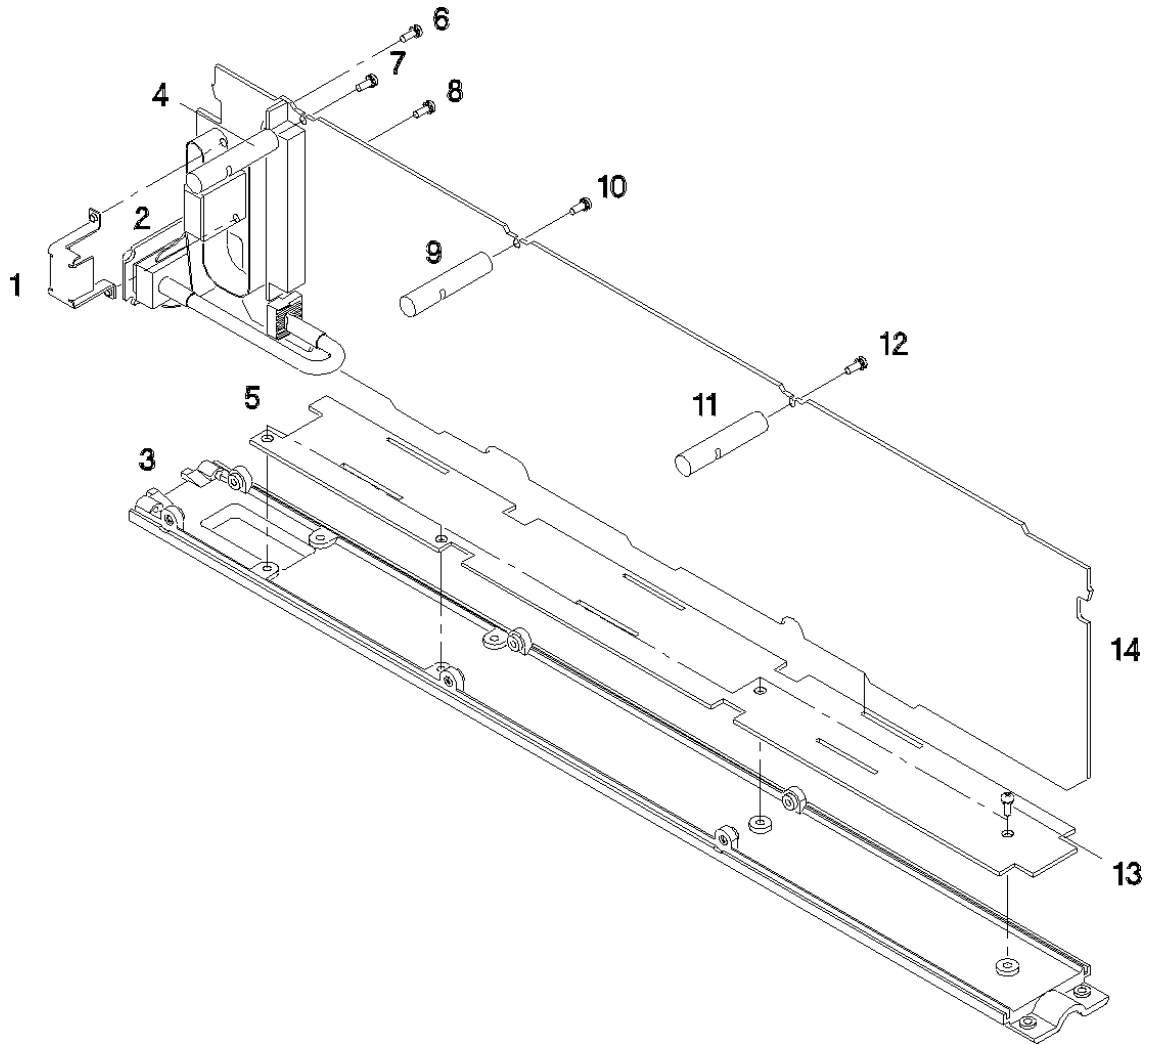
70611A Option 001 Rear Panel Removal
